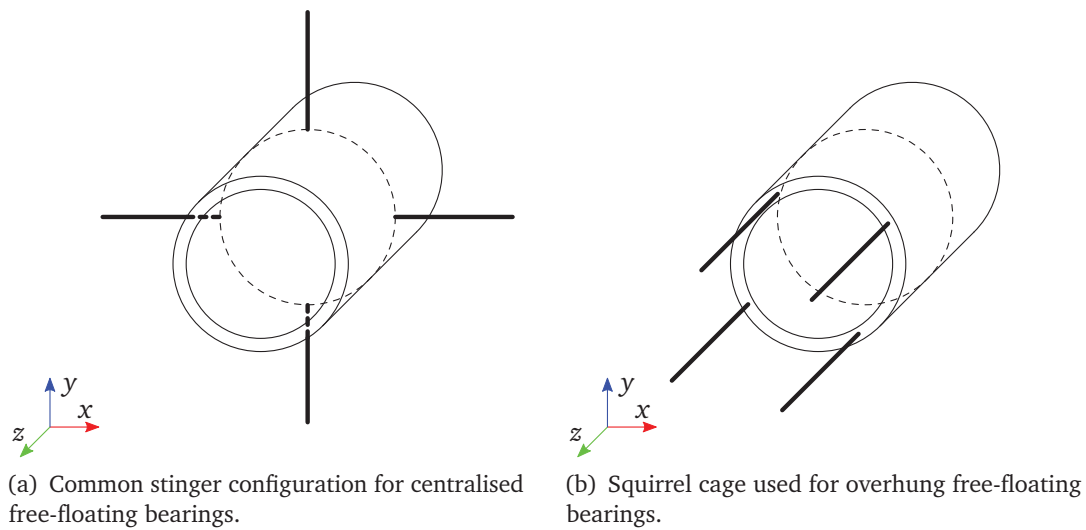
Two types of stinger placement used to constrain the unwanted motion of the test bearing.
